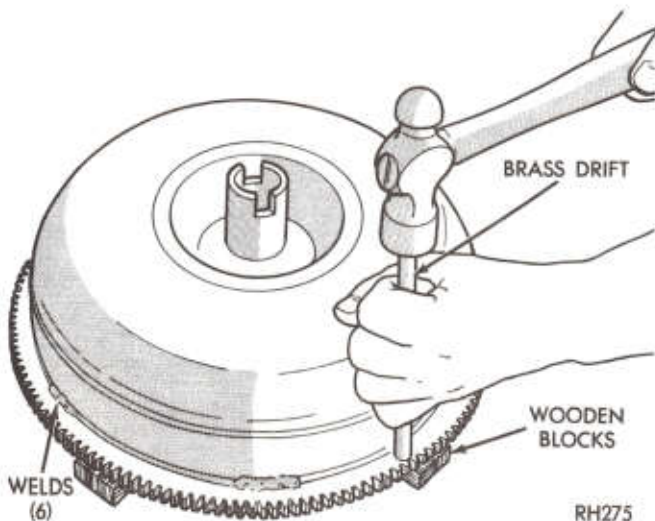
Remove Starter Ring Gear (Nonlockup Only)
